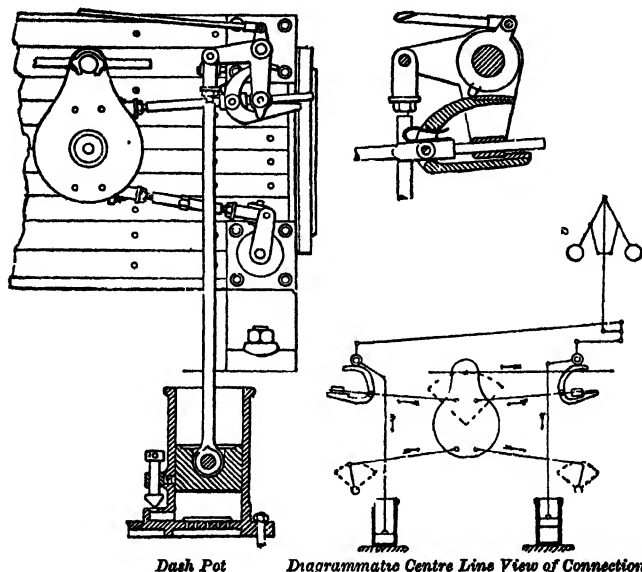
ORDINARY SINGLE ECCENTRIC REYNOLDS-CORLISS VALVE GEAR WITH TRIP MOTION FOR A HORIZONTAL ENGINE.
